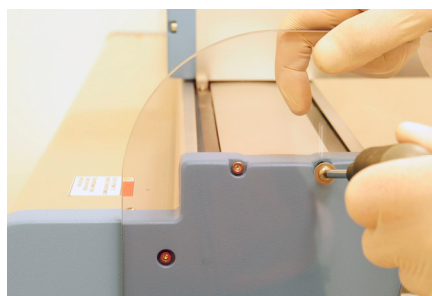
Attach the Side Guard to the left side of the robot.
